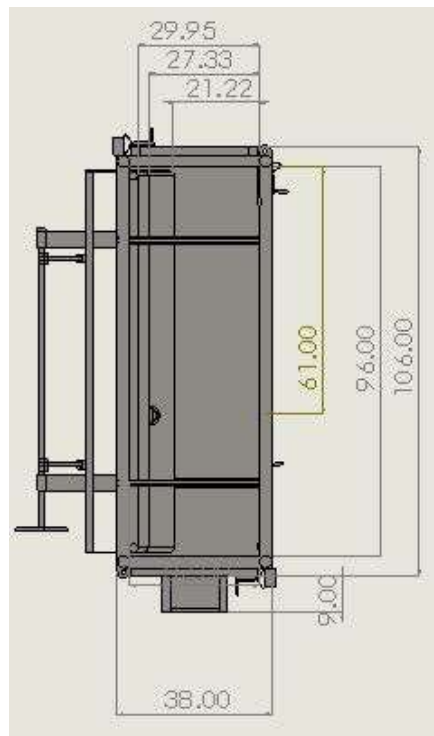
Image of top view of assembled chute model with dimensions (in inches)
